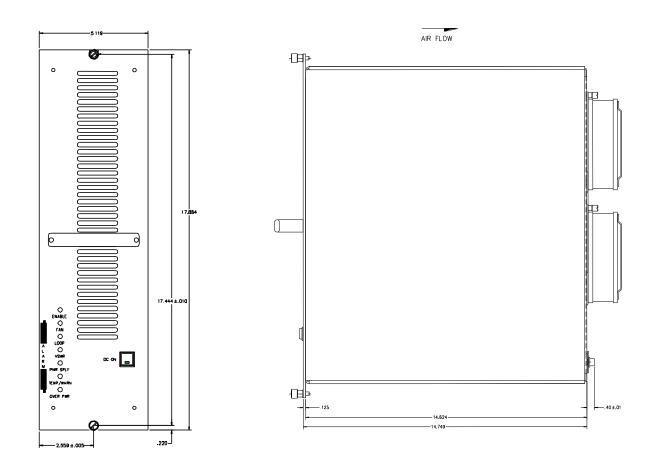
MPD Technologies, Inc. Model FFPA8689-120 Outline/Installation Drawing
